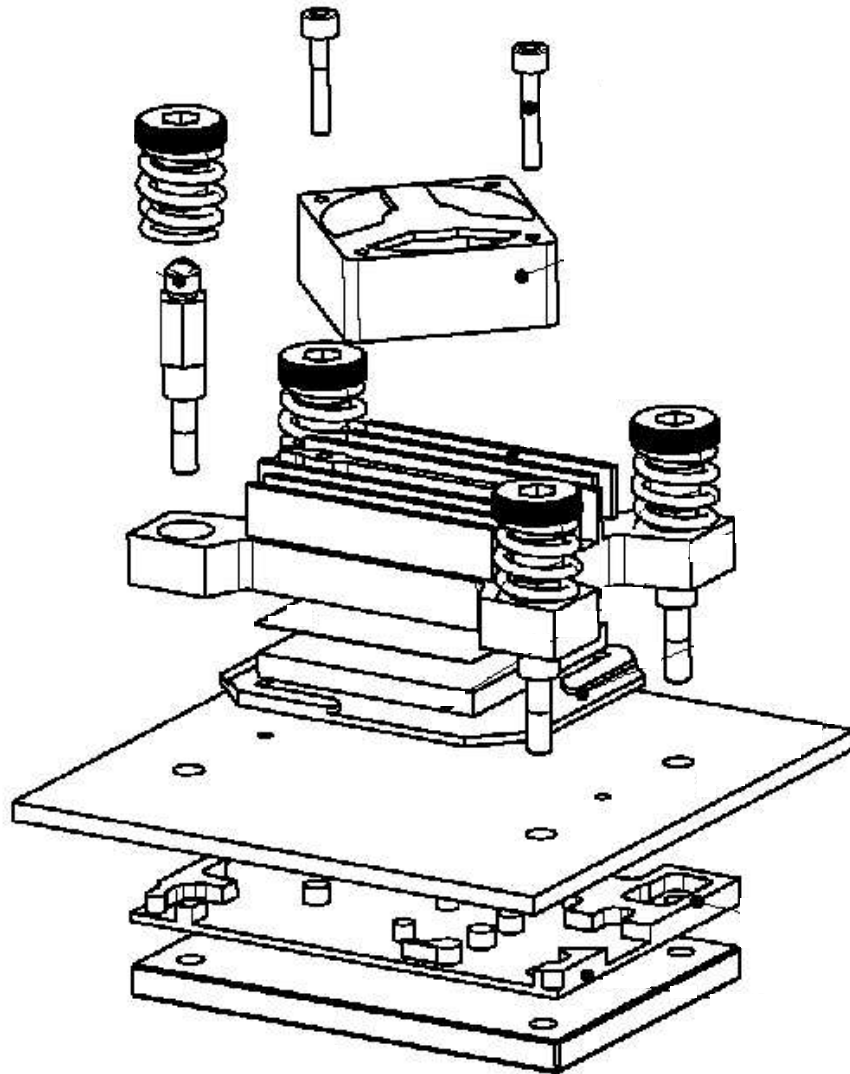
MSC8156 Solderless Socket with Heatsink and Fan
